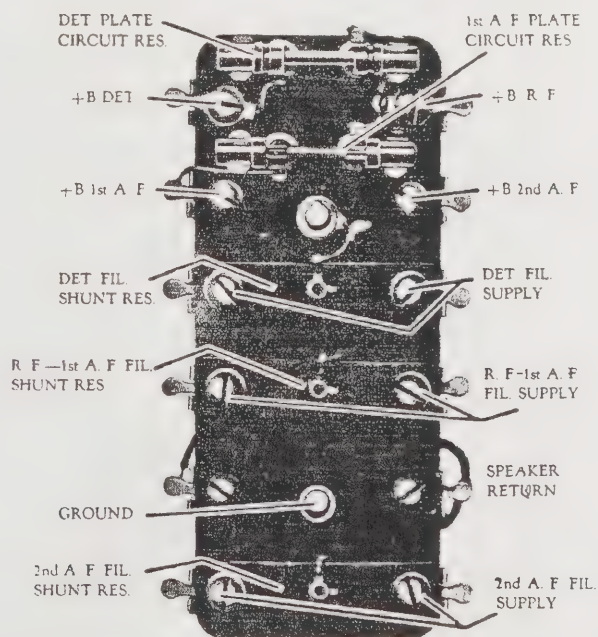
BOTTOM VIEW OF PANEL ASSEMBLY USED IN POWER UNIT OF MODELS 40, 42, 44 AND 52
